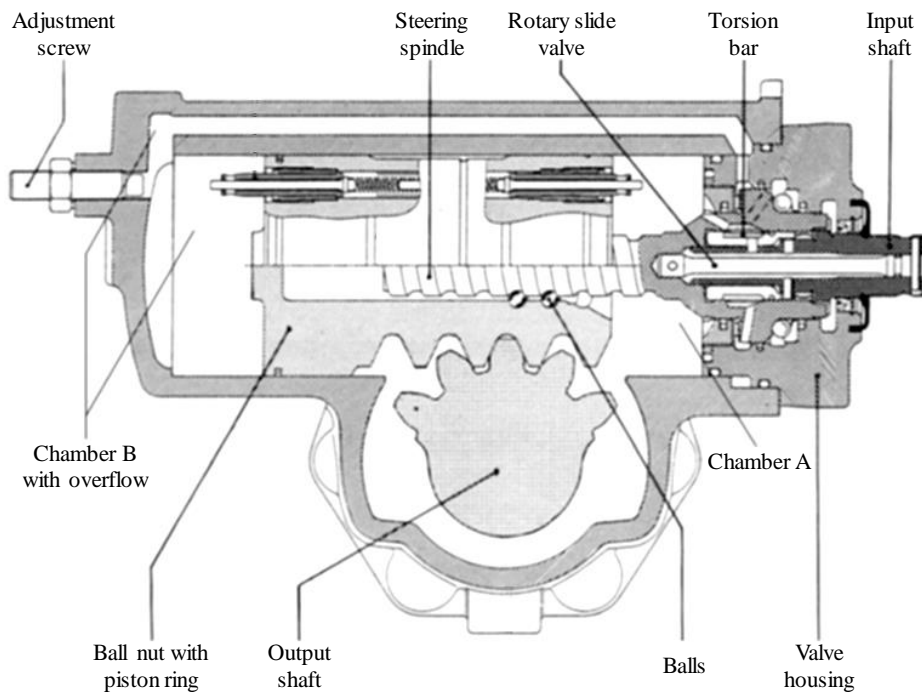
Cutaway view of RCB steering gear with integrated hydraulic piston<sup>28c</sup>
